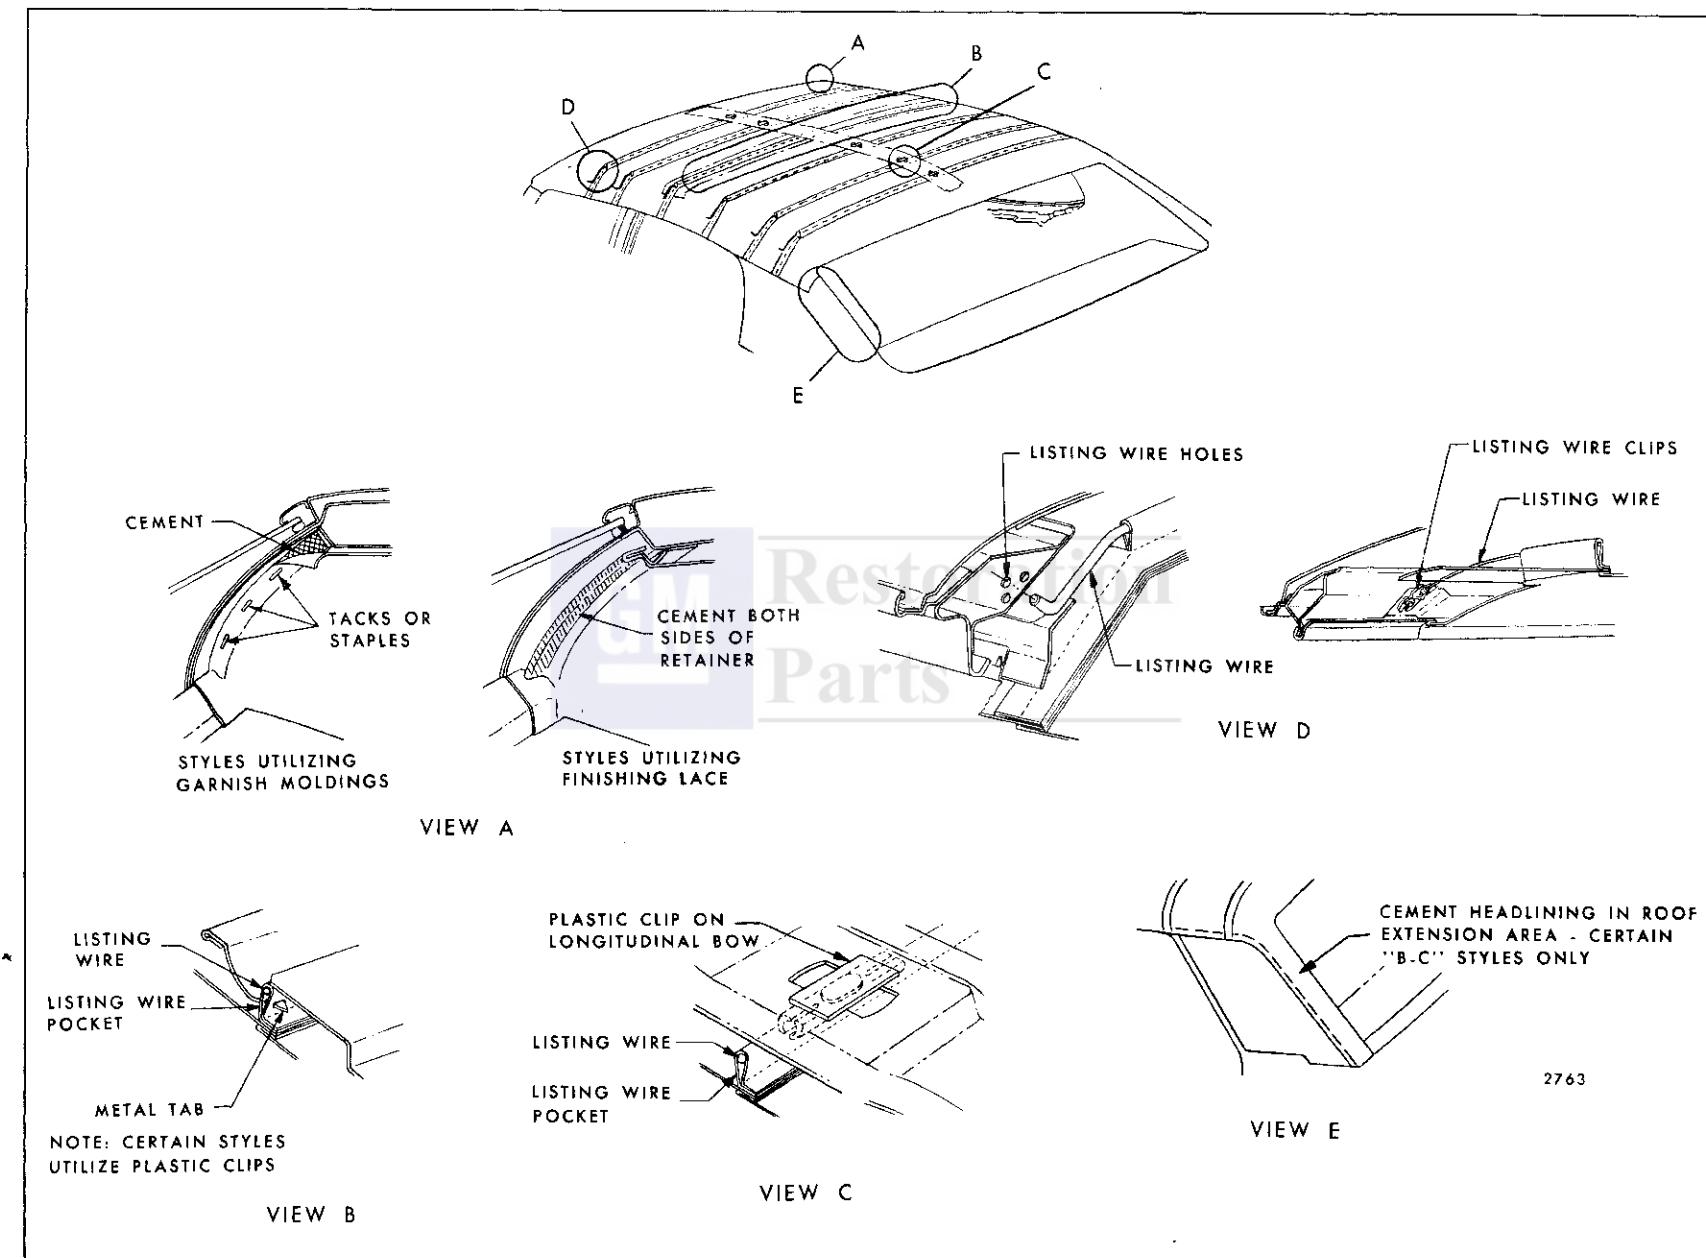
Typical Cloth and Vinyl Headlining Installations
